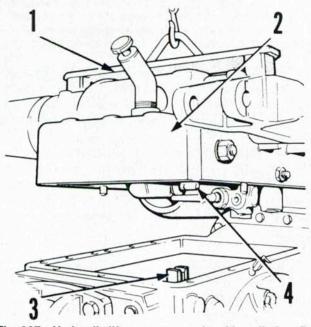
Hydraulic lift cover removal and installation. Be sure that roller (4) engages draft sensing yoke (3) when reinstalling.
